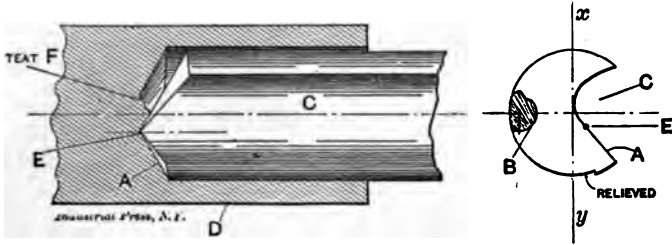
Pratt & Whitney Co.'s Deep Hole Drill
